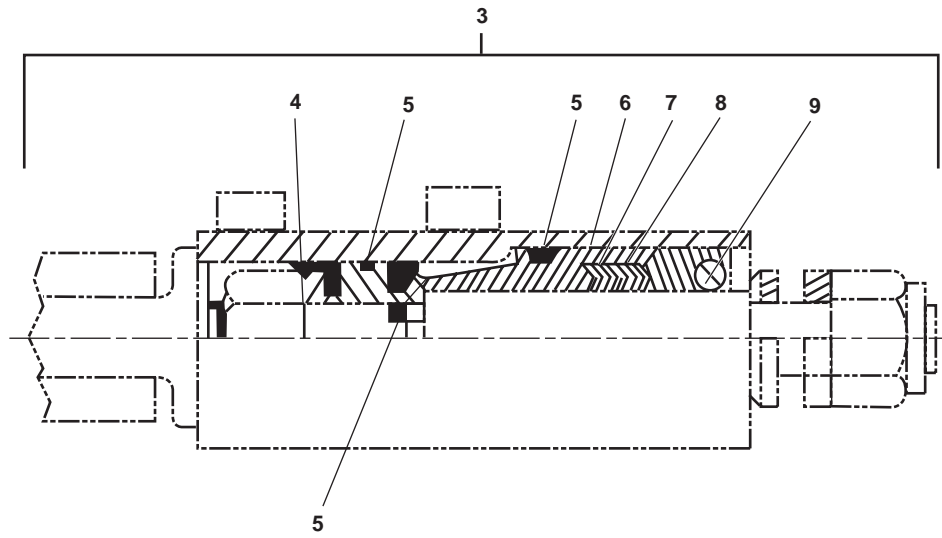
Hydraulic Watertight Doors (Sheet 2 of 9)
